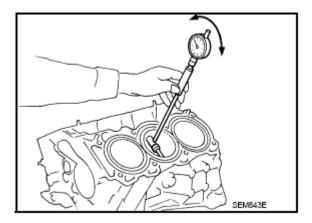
Measuring Cylinder Bore Wear, Out-Of-Round And Taper Courtesy of NISSAN MOTOR CO., U.S.A.
